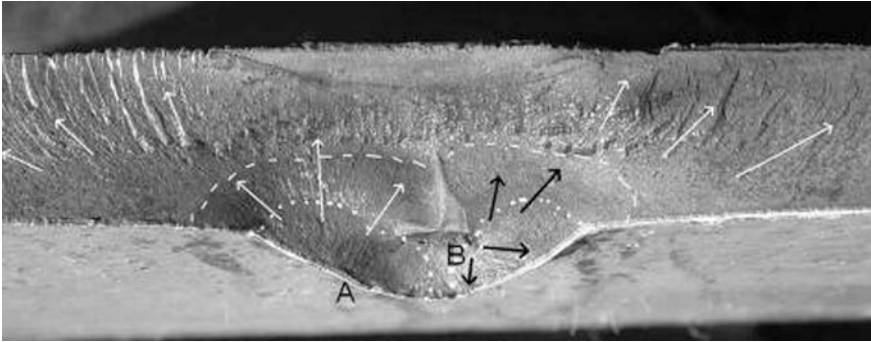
A2 Chevrons in different parts of the fracture surface
